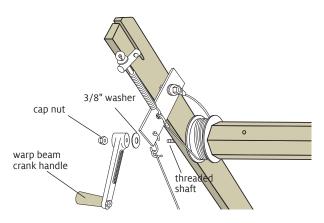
INSTALL WARP BEAM CRANK HANDLE
